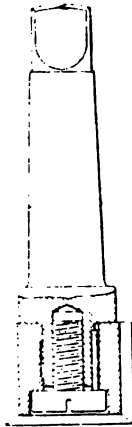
Common Method of holding Shell Cutter on Arbor, with Round Key to Drive, and Screw to Hold on.
